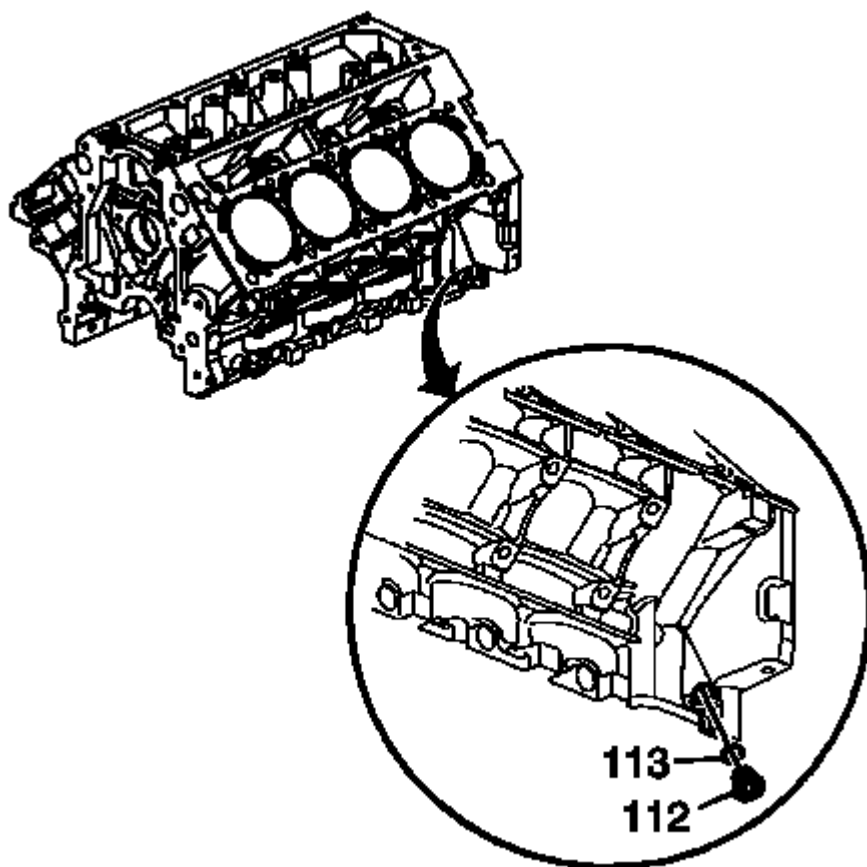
Engine Block Left Rear Oil Gallery Plug & Seal
